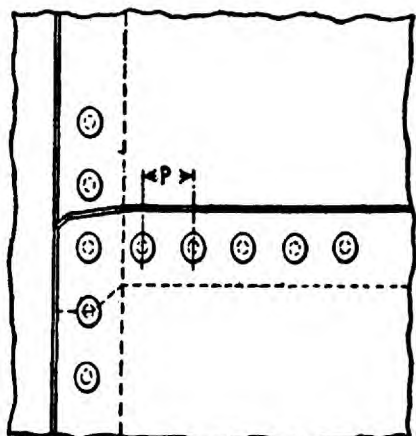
Example of Lap Joint, Longitudinal or Circumferential, Single-Riveted.
